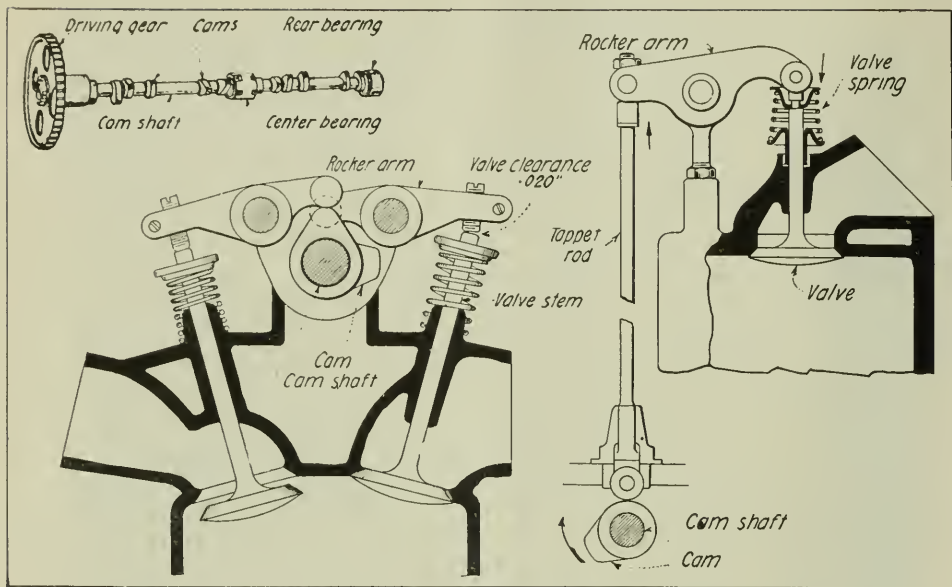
(upper left)—Camshaft, showing the driving gear and cams
